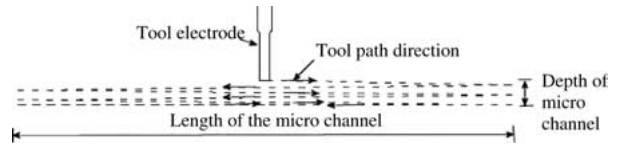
Bi-directional tool path movement during channel machining by micro EDM. Arrow shows the direction of the tool movement, which changes alternatively with every pass.
